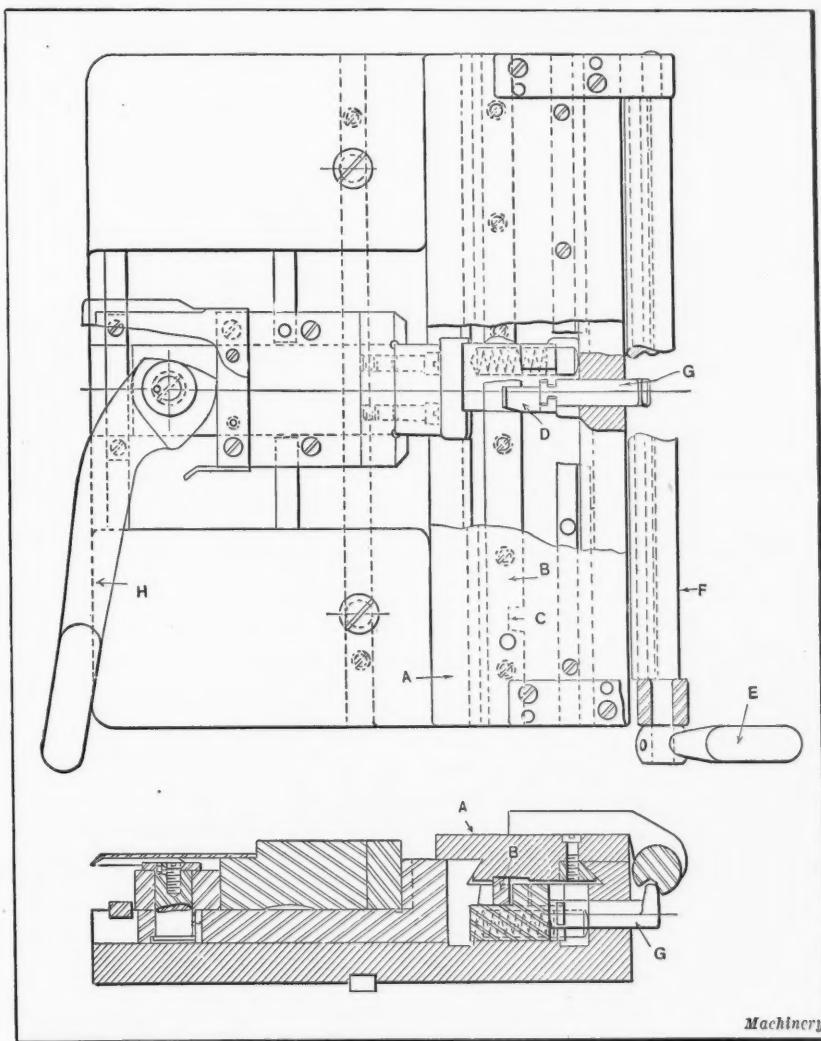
Sectional and Plan Views of Profiling Fixture shown in Fig. 2
